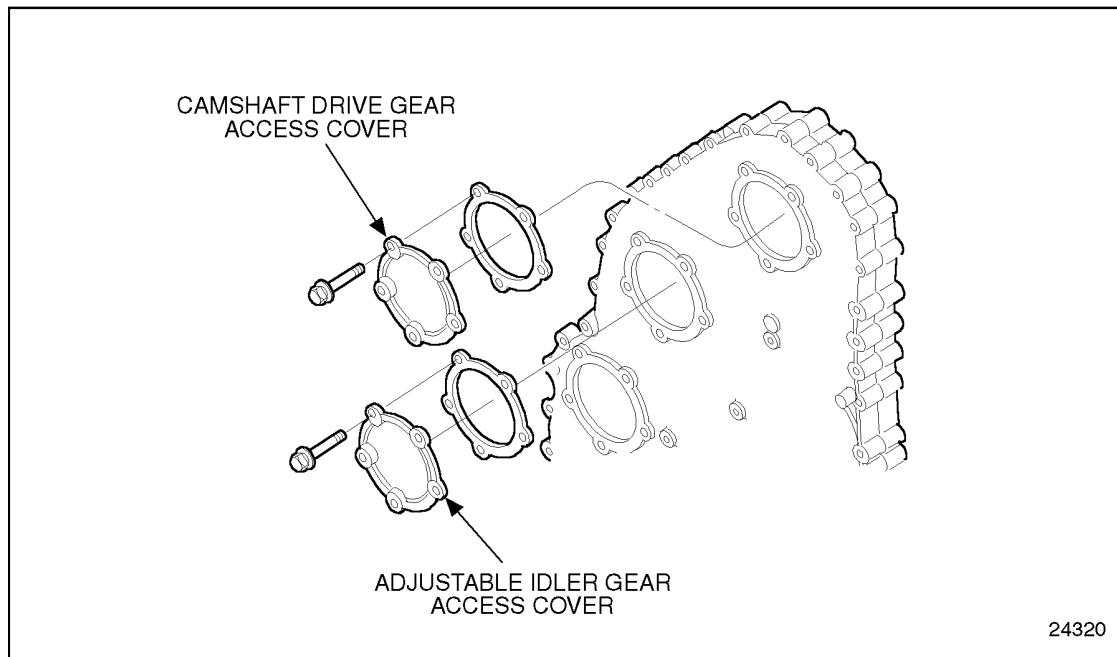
Camshaft Drive Gear and Adjustable Idler Gear Access Cover
